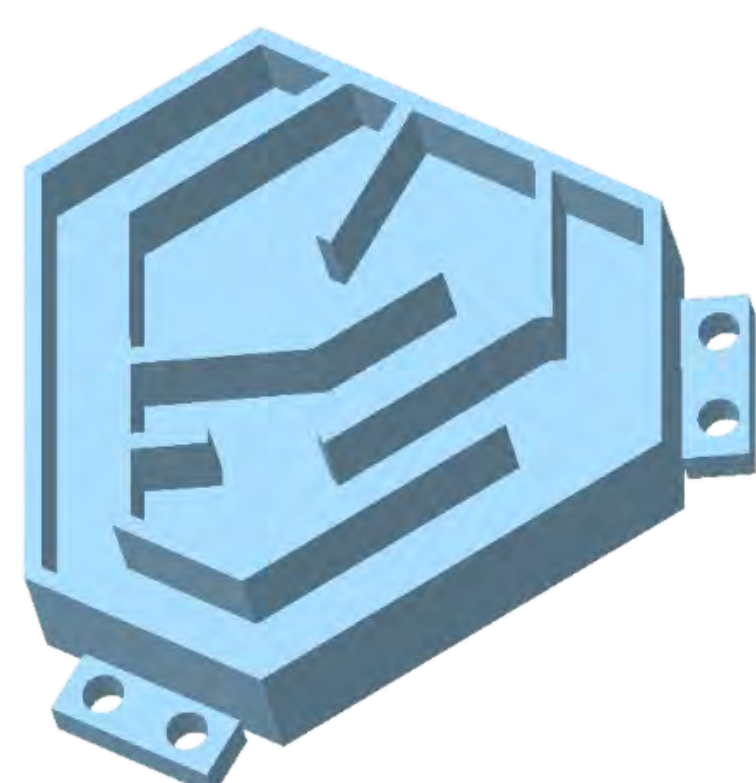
CAD model of ball maze attachment. Figure 3 Dimensioned CAD ball model.
